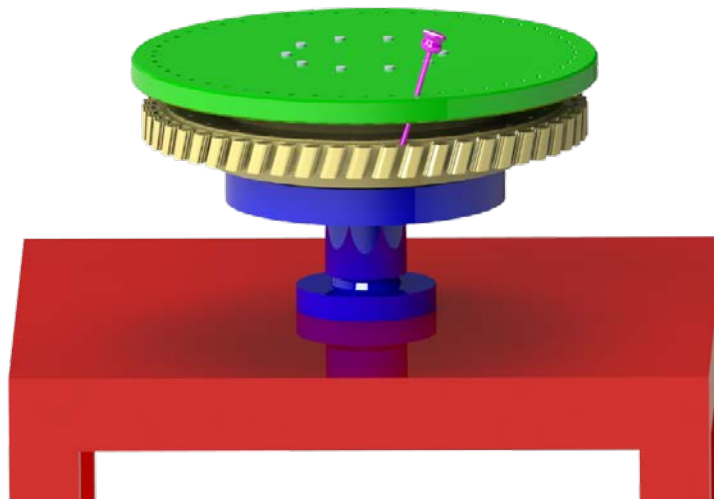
Assembly model of the disk-mounted guided punch design.
